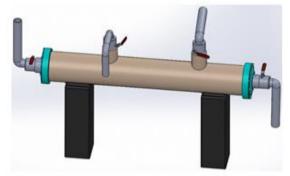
3D model of Shell and Tube Heat Exchanger assembly. *Mechanical design
